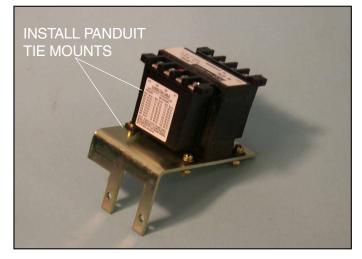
CPT Module Installed on the CPT Module Mounting Bracket.
